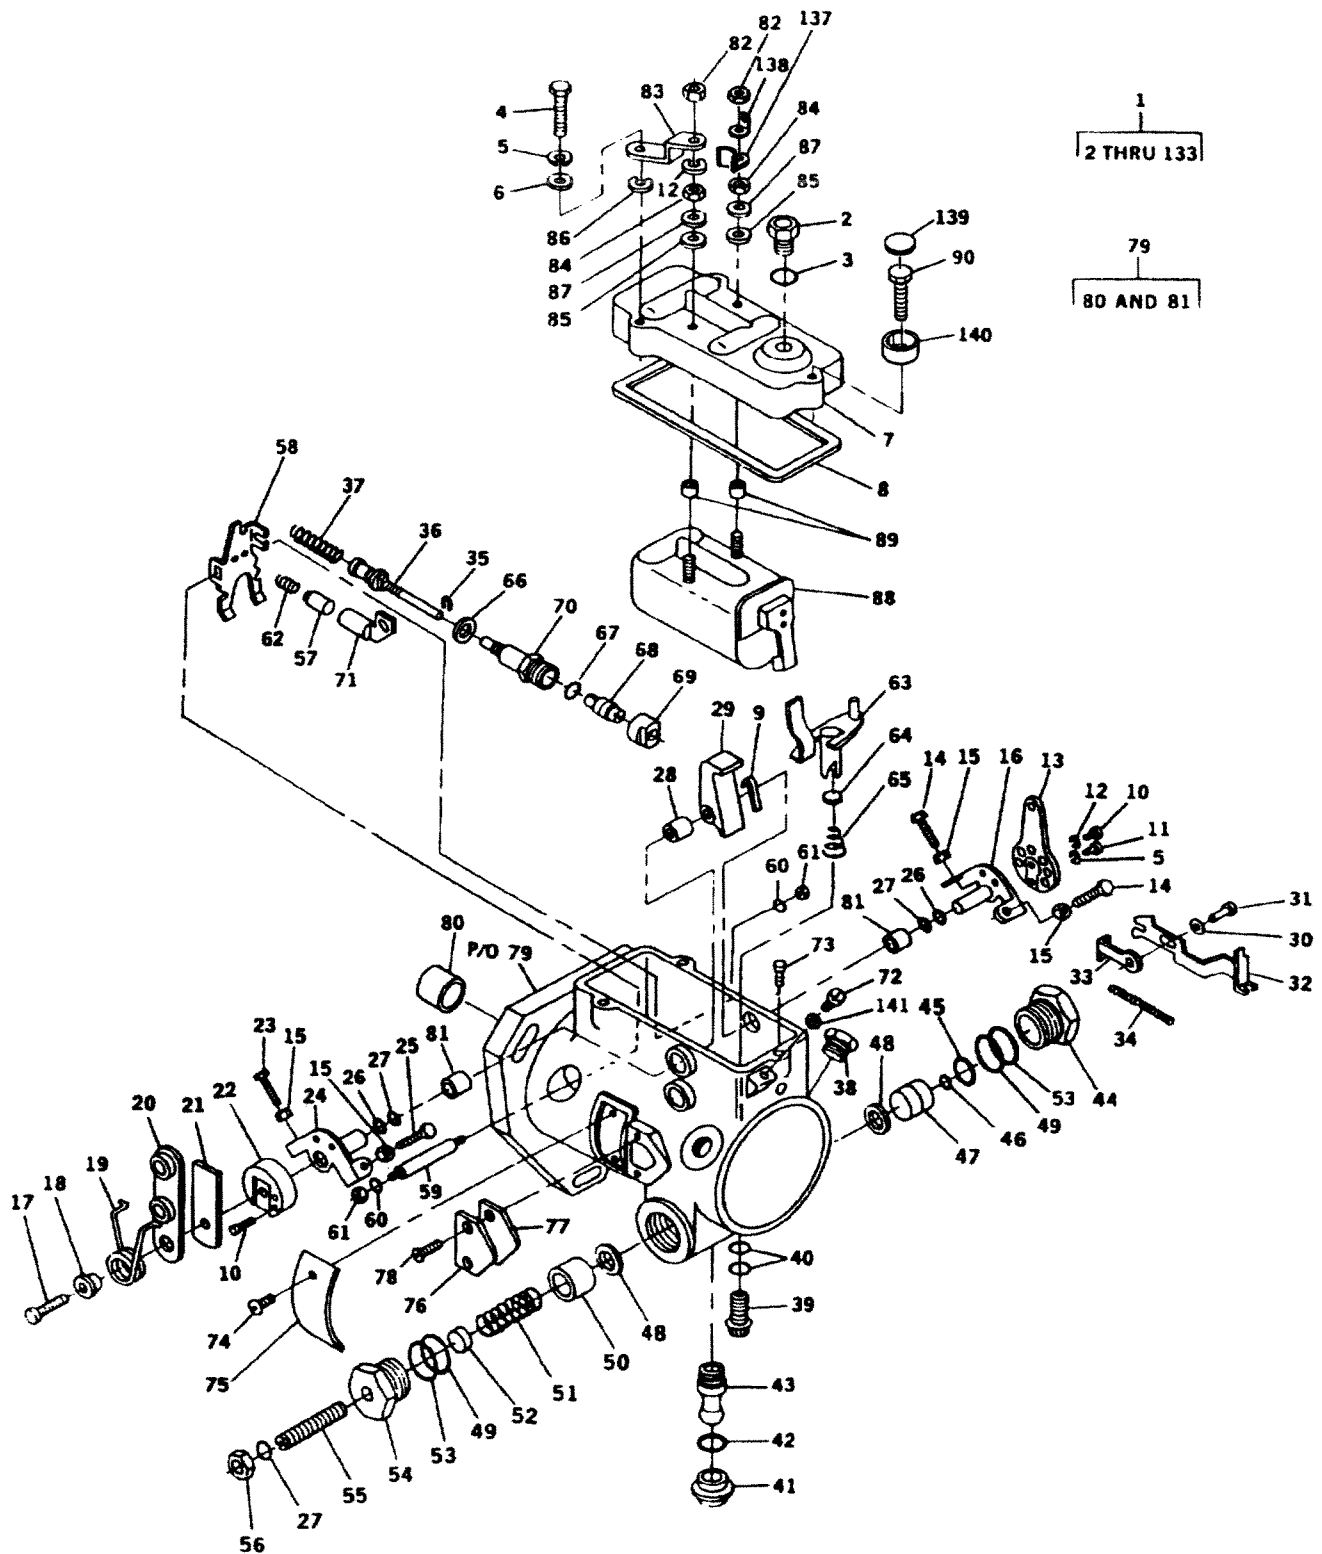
Fuel Injection Pump (Sheet 1 of 2)
